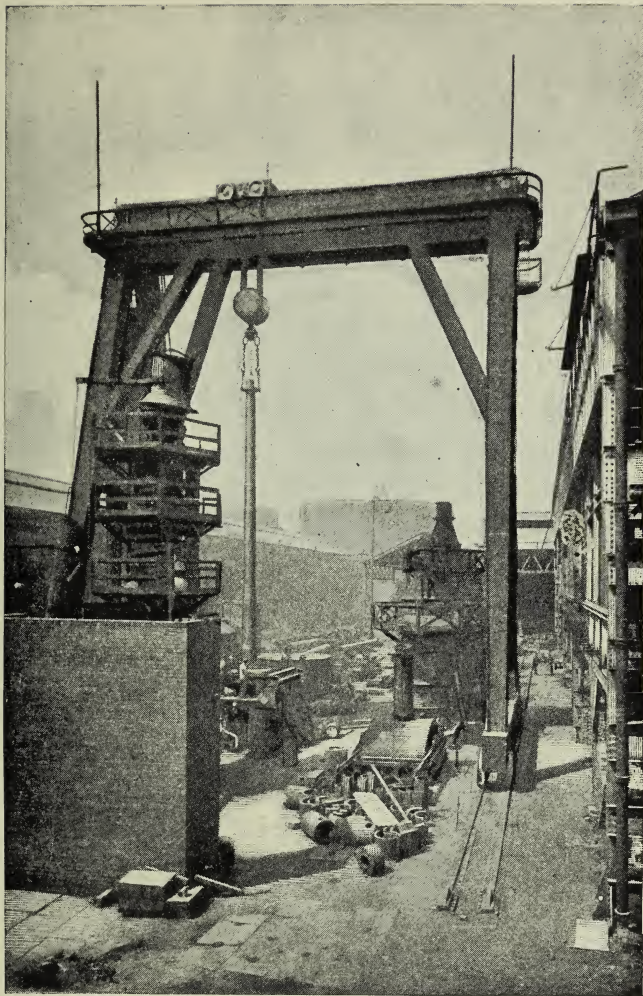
Gun-building Plant. A gun being lowered into a tank of oil to be tempered.
